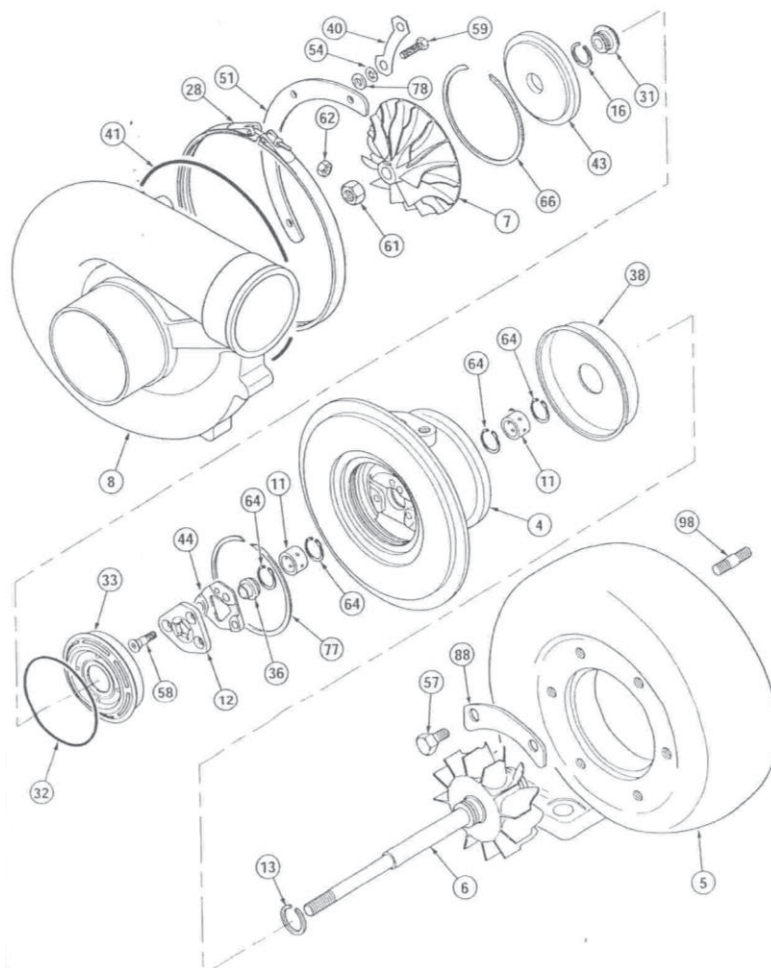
Exploded view of a compressor and gas generator turbine unit.
